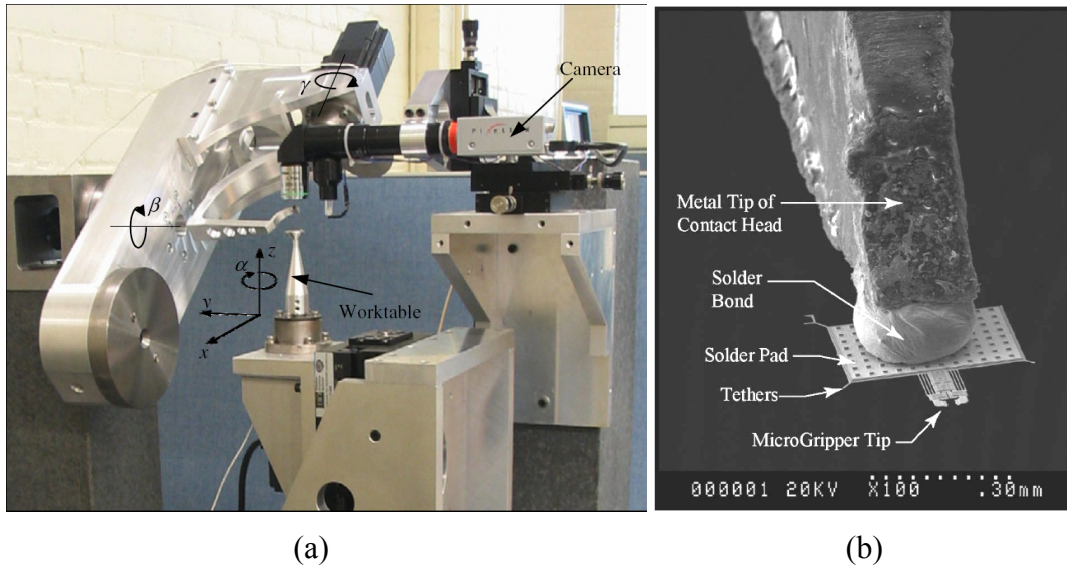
(a) Five axis robotic workstation, (b) solder bonded microgripper [19].
